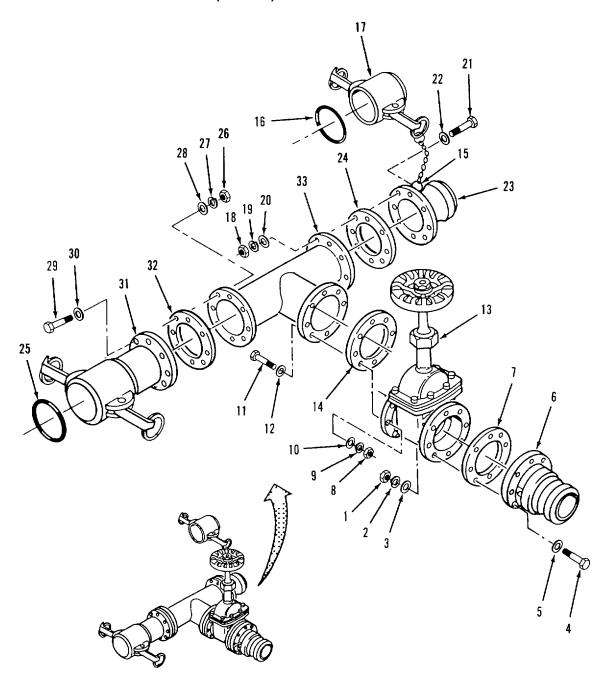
Tee and Gate Valve Assembly (9114-Y2) Disassembly.
